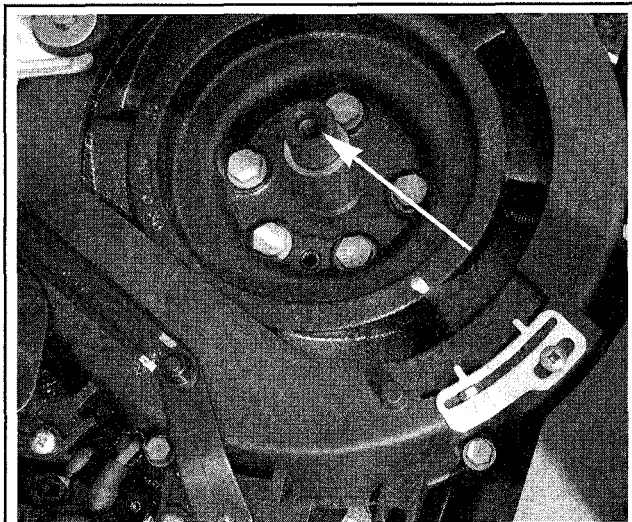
The easiest method of rotating the crankshaft is to thread a bolt into the top of the shaft, then use a wrench or socket on the bolt head
